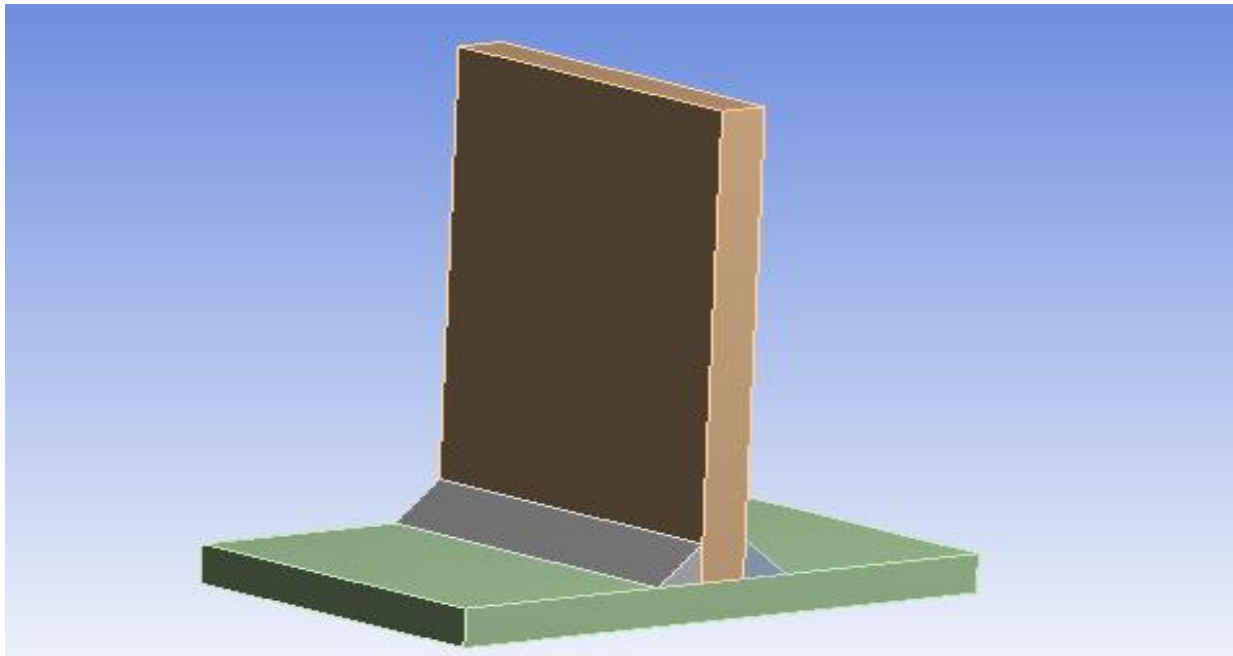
Three-dimensional CAD model of the T-shaped fillet weld joint
